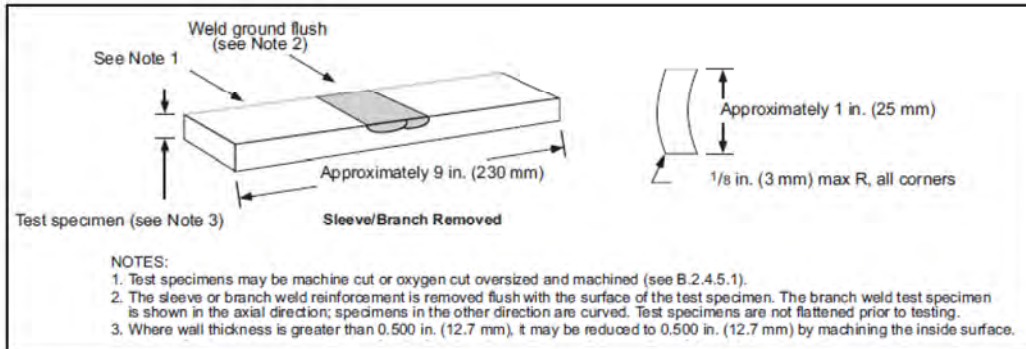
Face Bend Test Specimen Preparation for In-Service Welding Procedure Qualification
